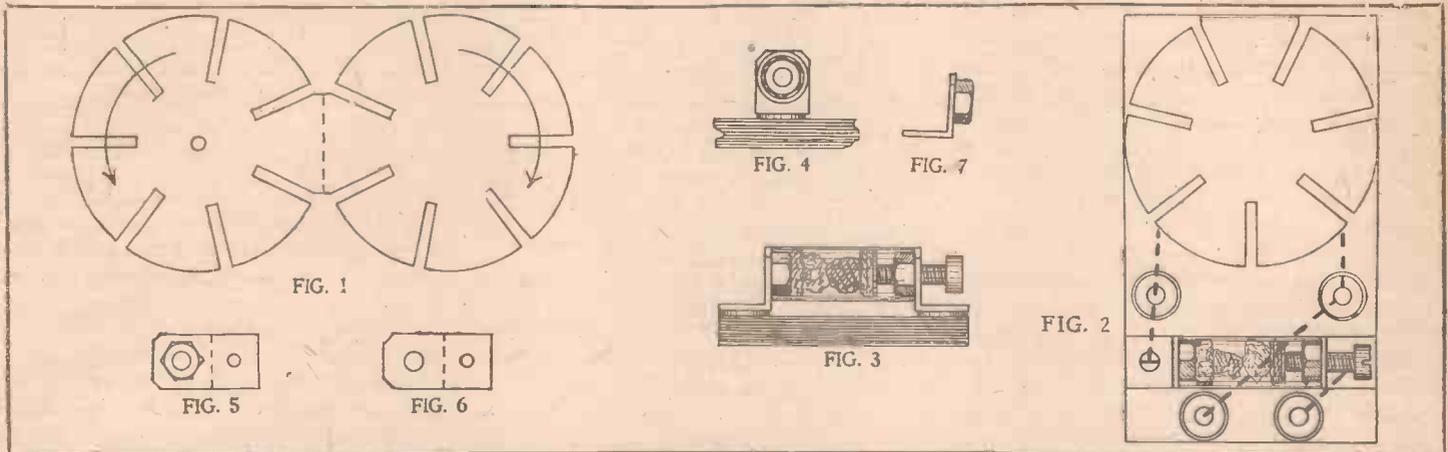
The Tuner Former. Fig. 2.—Arrangement of Components. Fig. 3.—Detector. Fig. 4.—End View of Detector. Figs. 5, 6 and 7.—Details of Detector Brackets.
